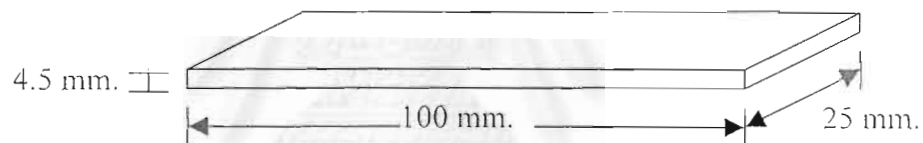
Dimension of flexure stress and MOE testing specimen.
